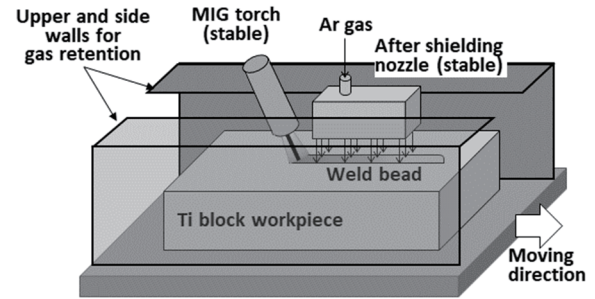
Schematic diagram of additional setup for multi-pass MIG titanium welding.
